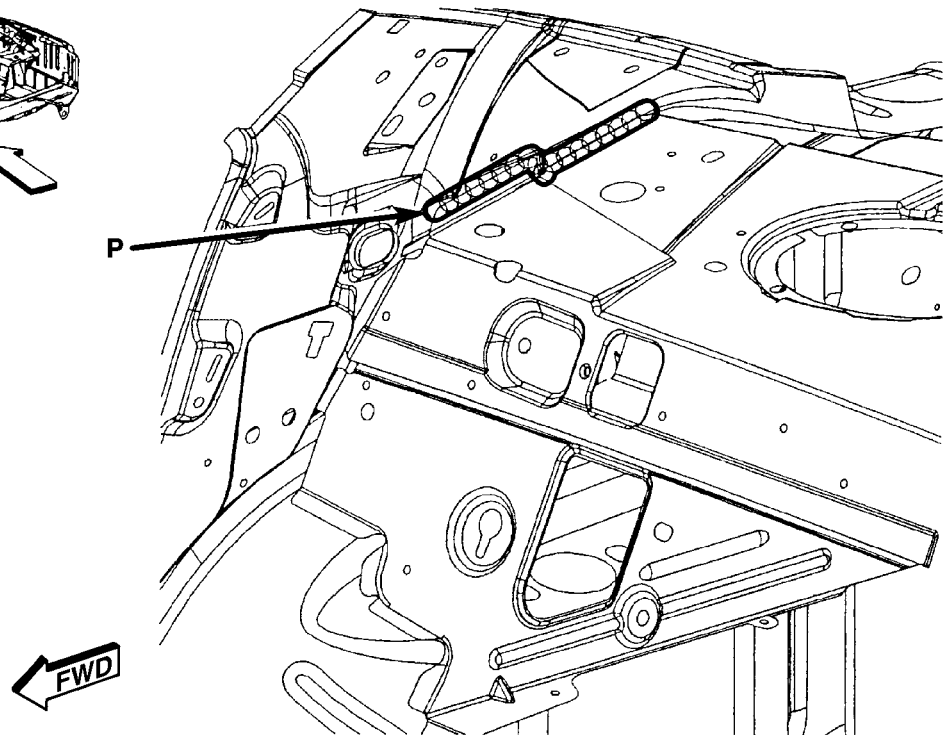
SILL INNER EXTENSION TO INNER REAR WHEELHOUSE
